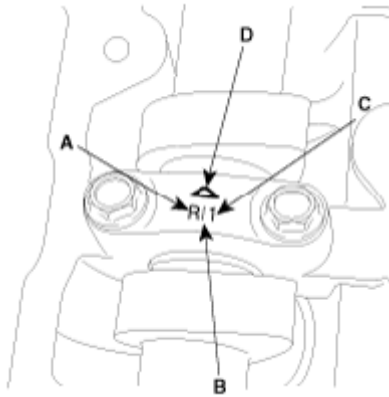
Installing LH/RH Camshaft Bearing Cap & Thrust Bearing Cap
